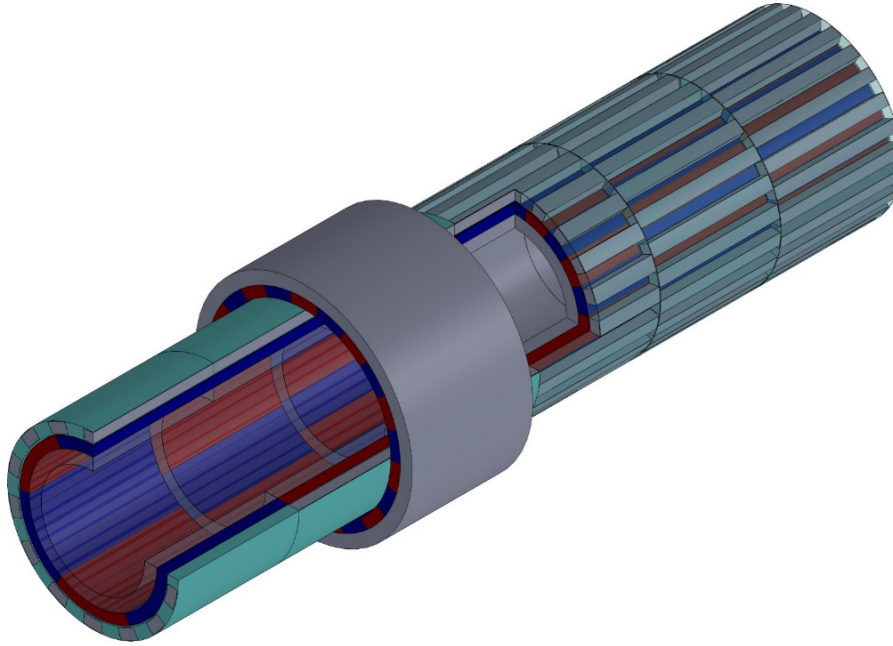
Magnetic gearbox solution with a moving ring.
